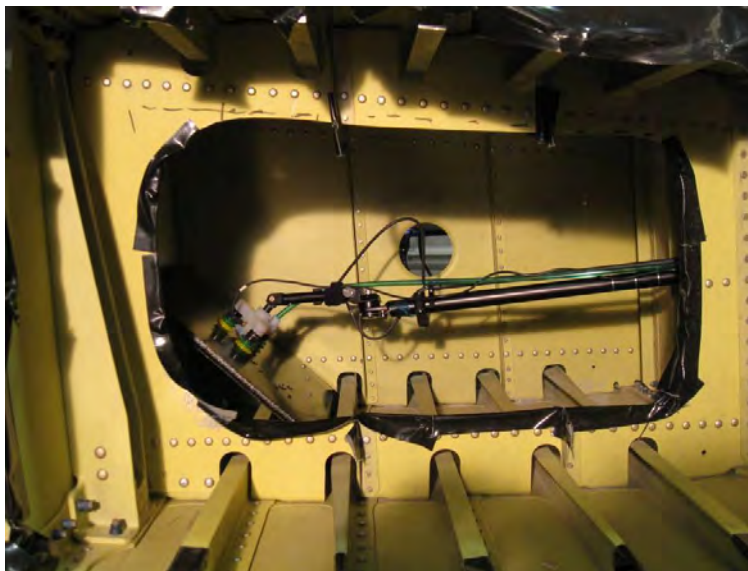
Remote Pulse Echo inspection using the Vacuum Assist End Effector on the Surgical NDE Tool.
